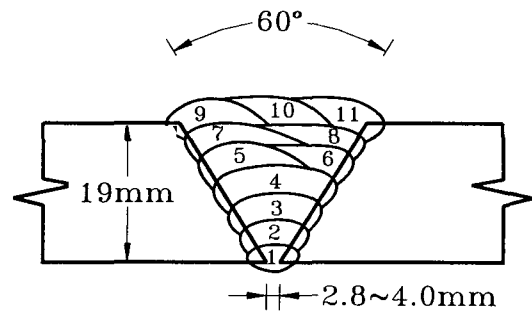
Schematic diagram of specimen and welding procedure
